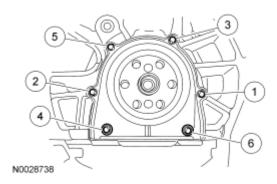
Identifying Tightening Sequence Of Crankshaft Rear Oil Seal Bolts Courtesy of FORD MOTOR CO.
